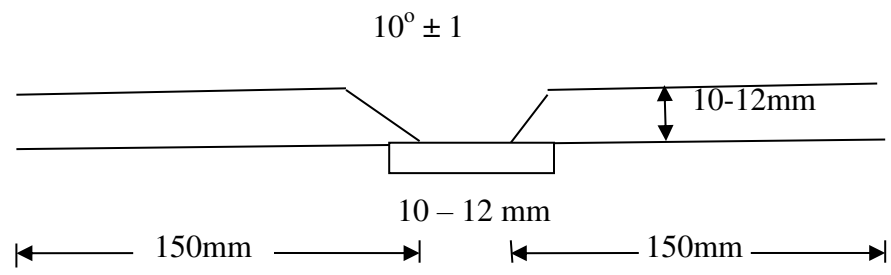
Presenting of Plates & back strip before welding.
